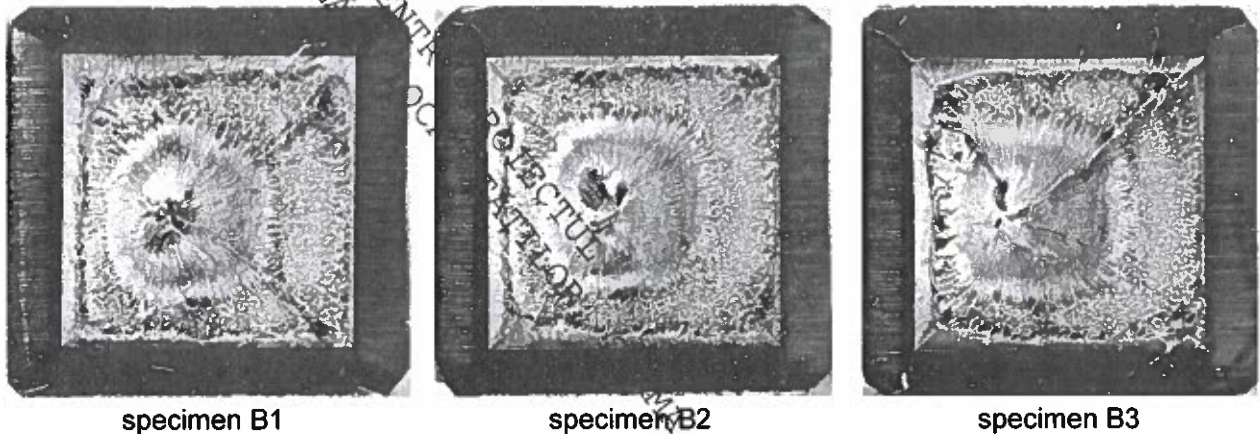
Top view of the fracture surfaces (one half of each specimen)
